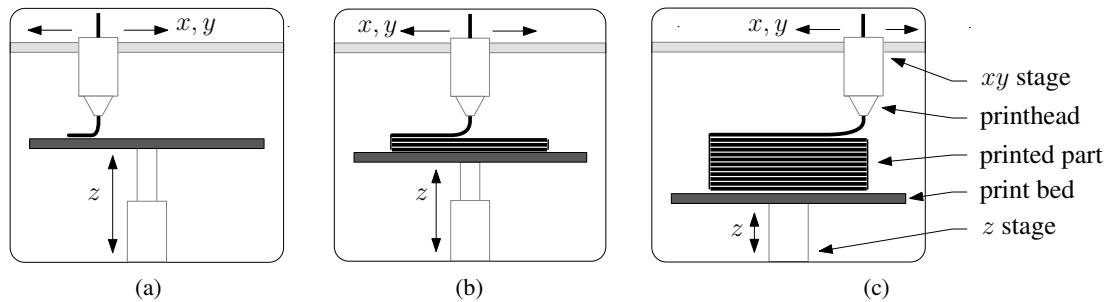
Schematic overview 3D print setup and printing process: (a) printing the first layer, (b) printing an intermediate layer, (c) printing the final layer and components of the setup
